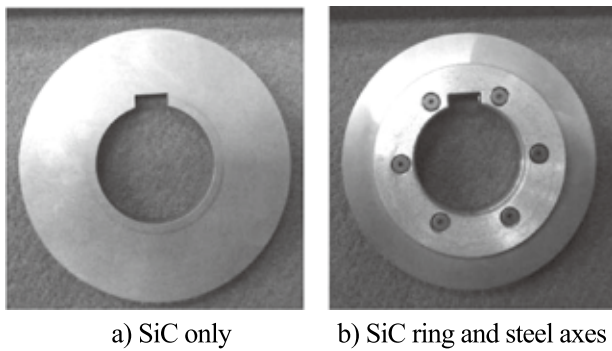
Photographs showing appearance of specimen after hot rolling wear test
